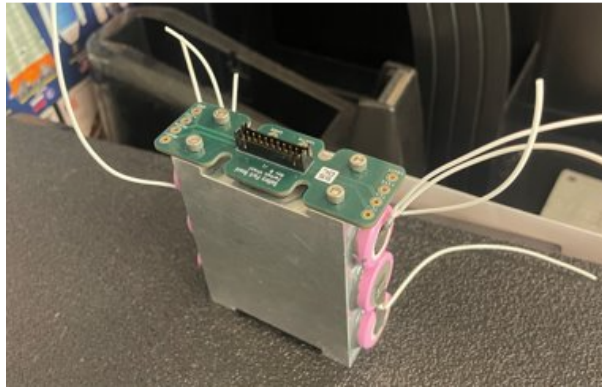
GPDM battery pack EDU during initial assembly. Note that
